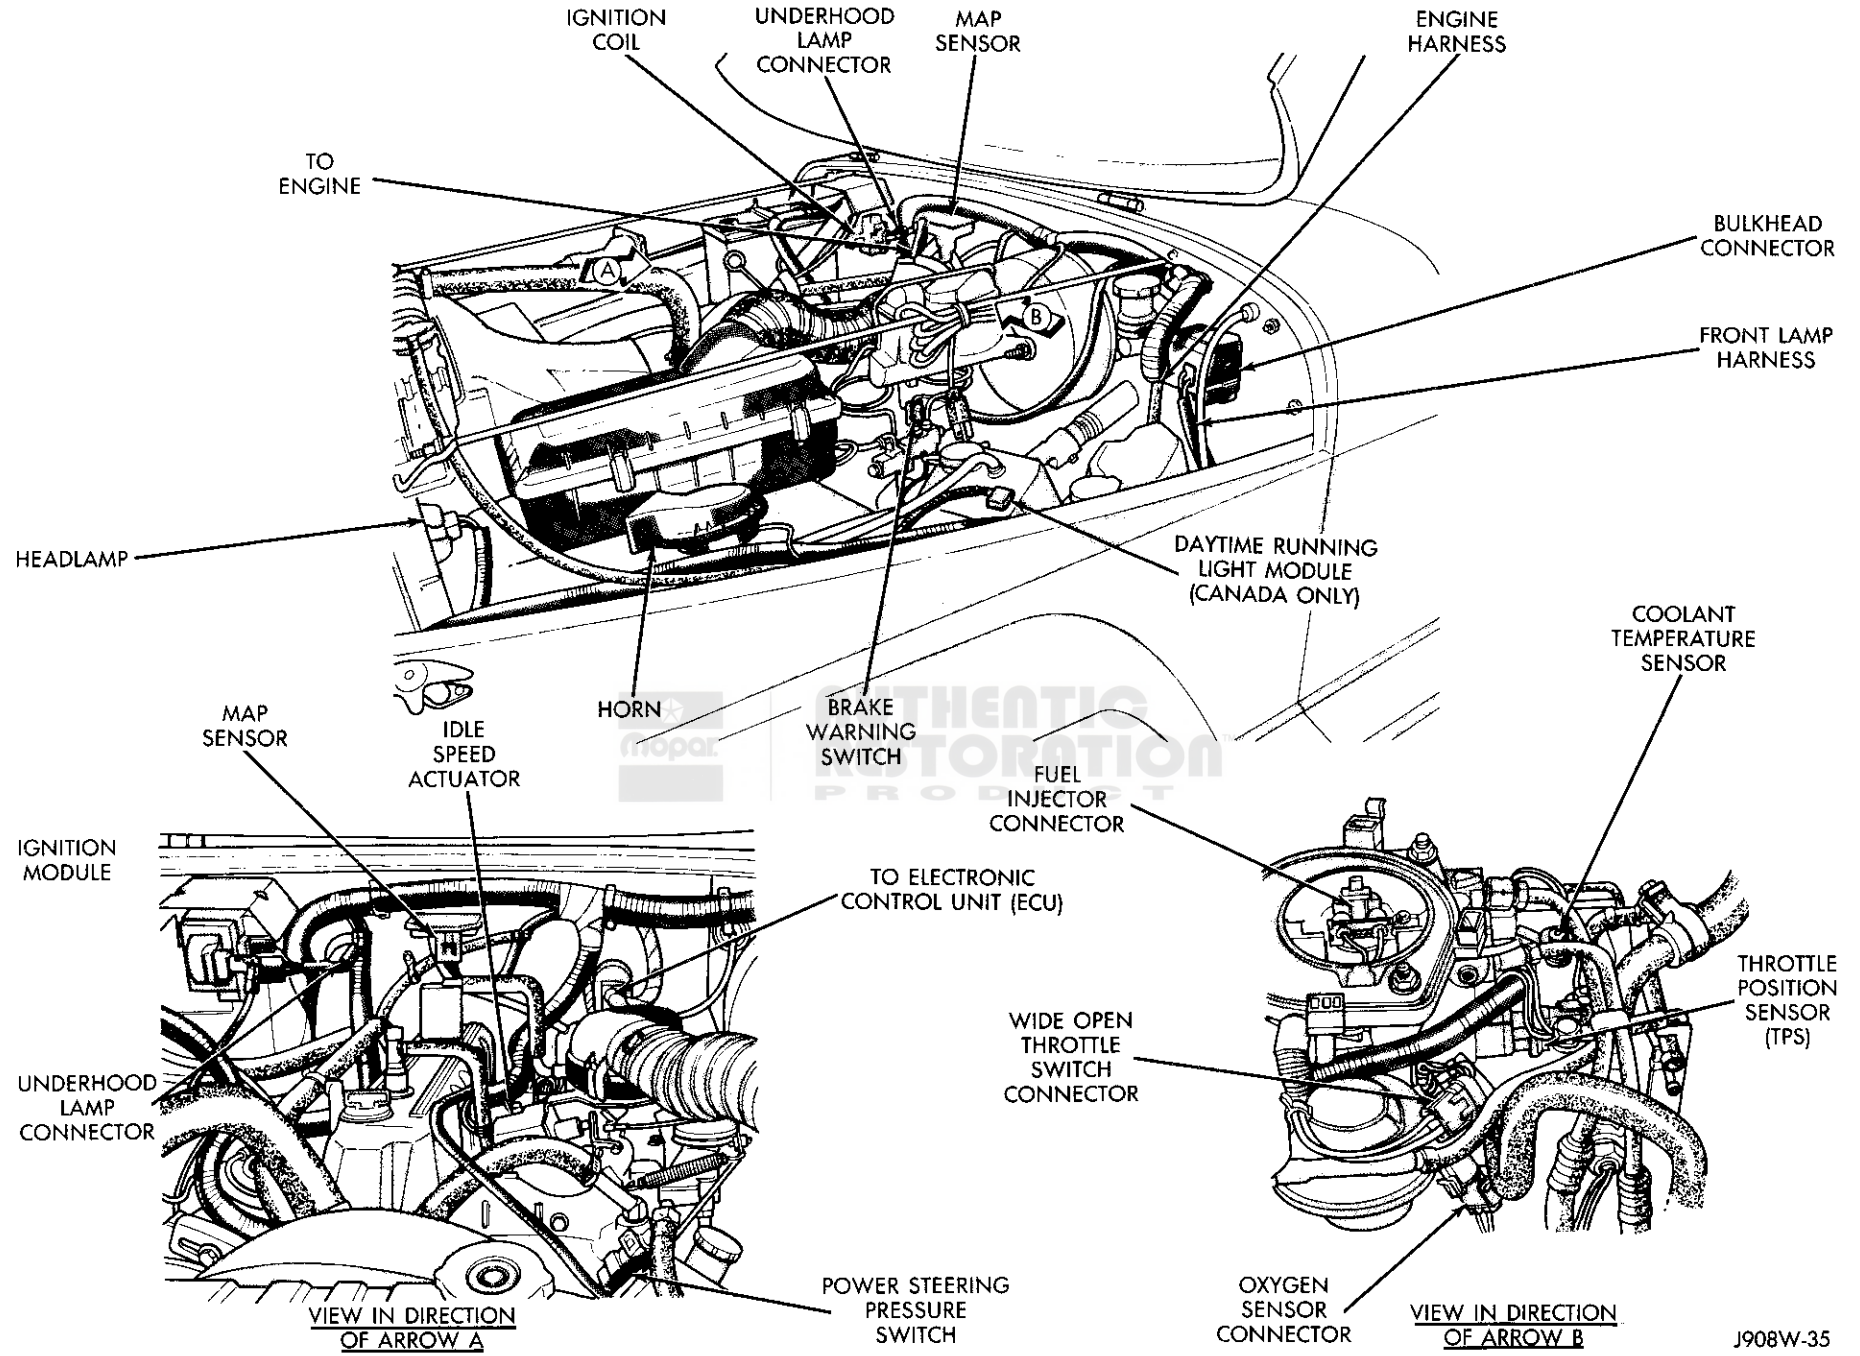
Left Side Engine Compartment Wiring 2.5L Engine - YJ
